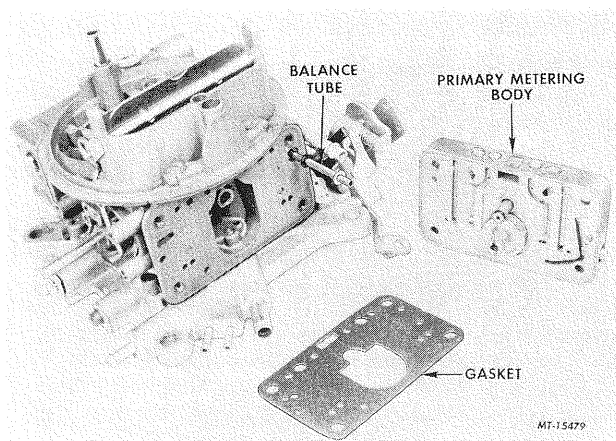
Removal or Installation of Primary Metering Body (with Pump Transfer Tube)
